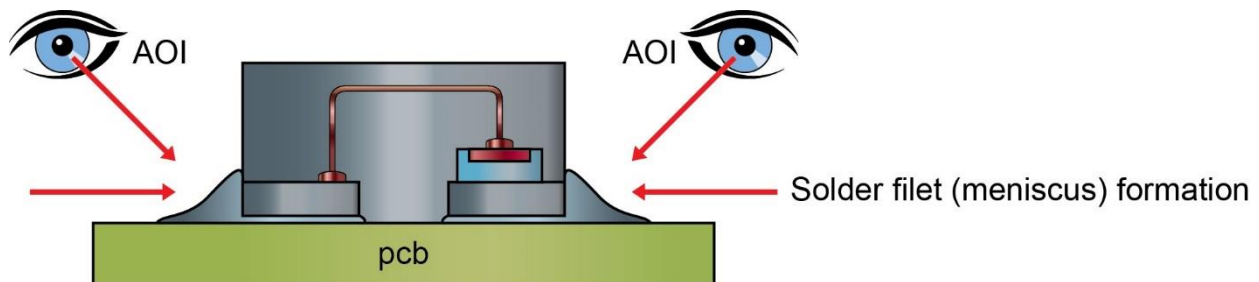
AOI enabled DFN package with Side Wettable Flanks (SWF)
